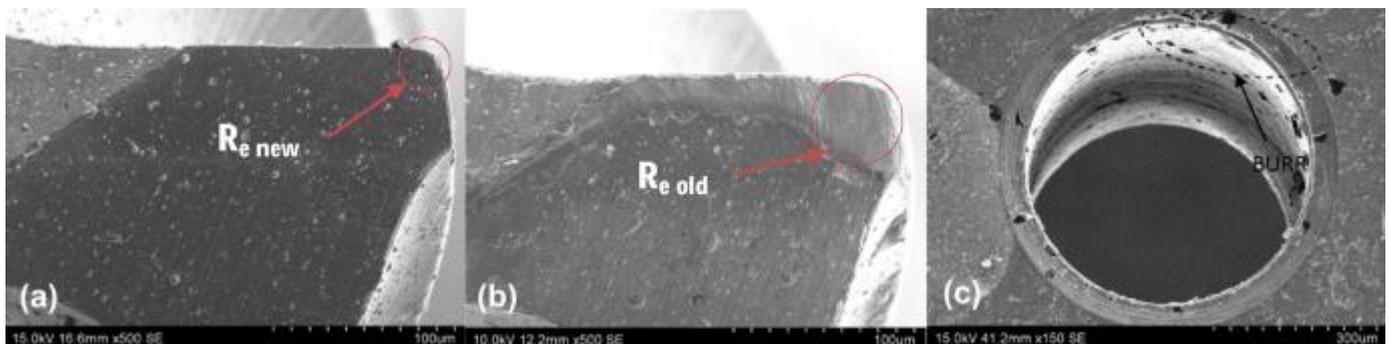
Cutting edge radius of 0.5 mm micro drills before and after drilling of 118 holes (a) new drill, (b) drill after 118 holes, (c) burr formation [14]
